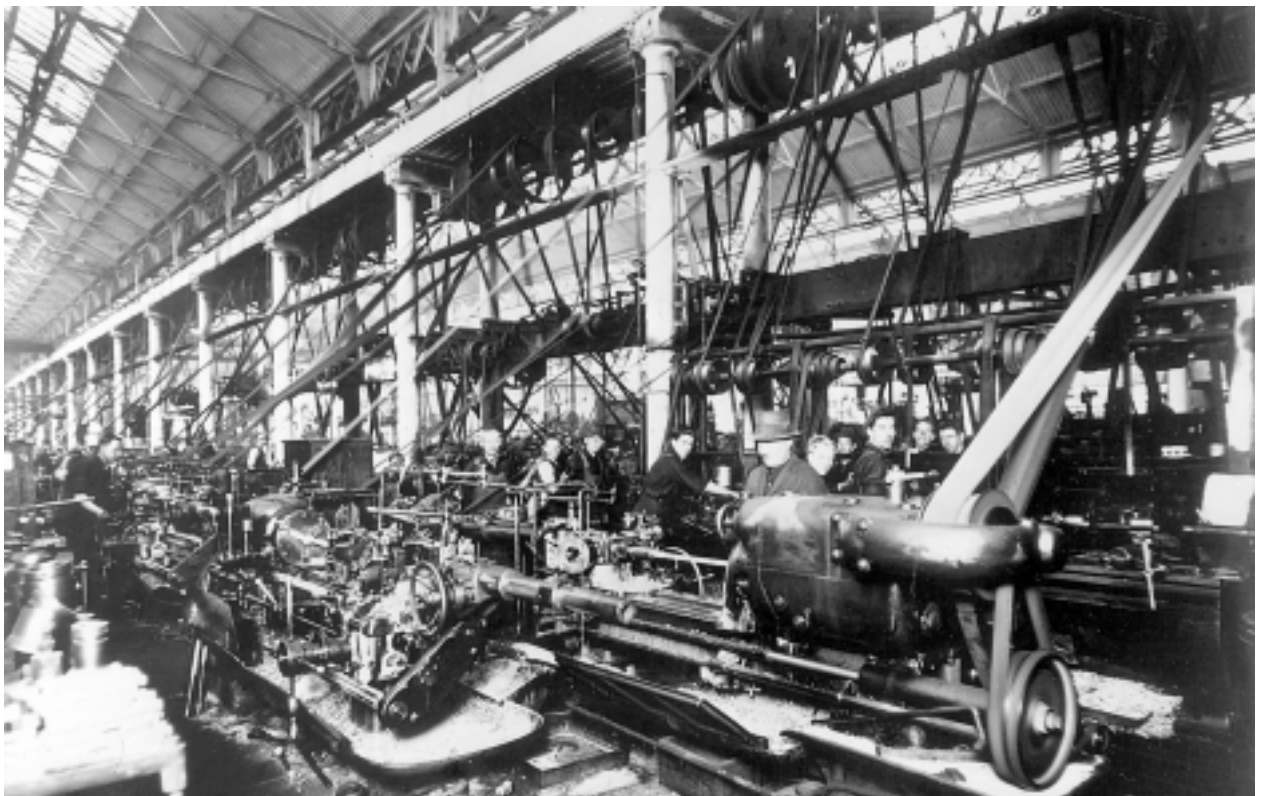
Machine Shop lathes belt driven from counter shaft. Bay 10 or 11 looking south from northern end of bay. Screwing crown stays. This photograph shows that many, if not all the belts, which ran to the machines, generally at head height, were uncaged. In some cases the belts appear to be 6m long and doubtless this, in part, accounted for the poor safety record of the early days of the workshops operation. Source: SRAO ELW 601/23.
